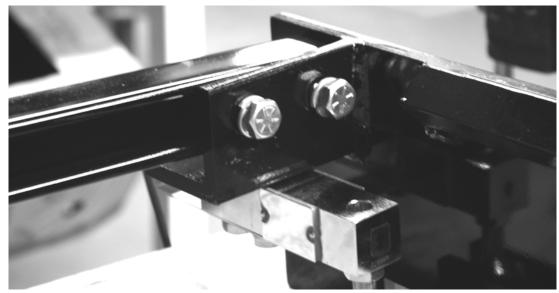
Slide the Uni-Strut Center Bars onto the End Plate Assembly
